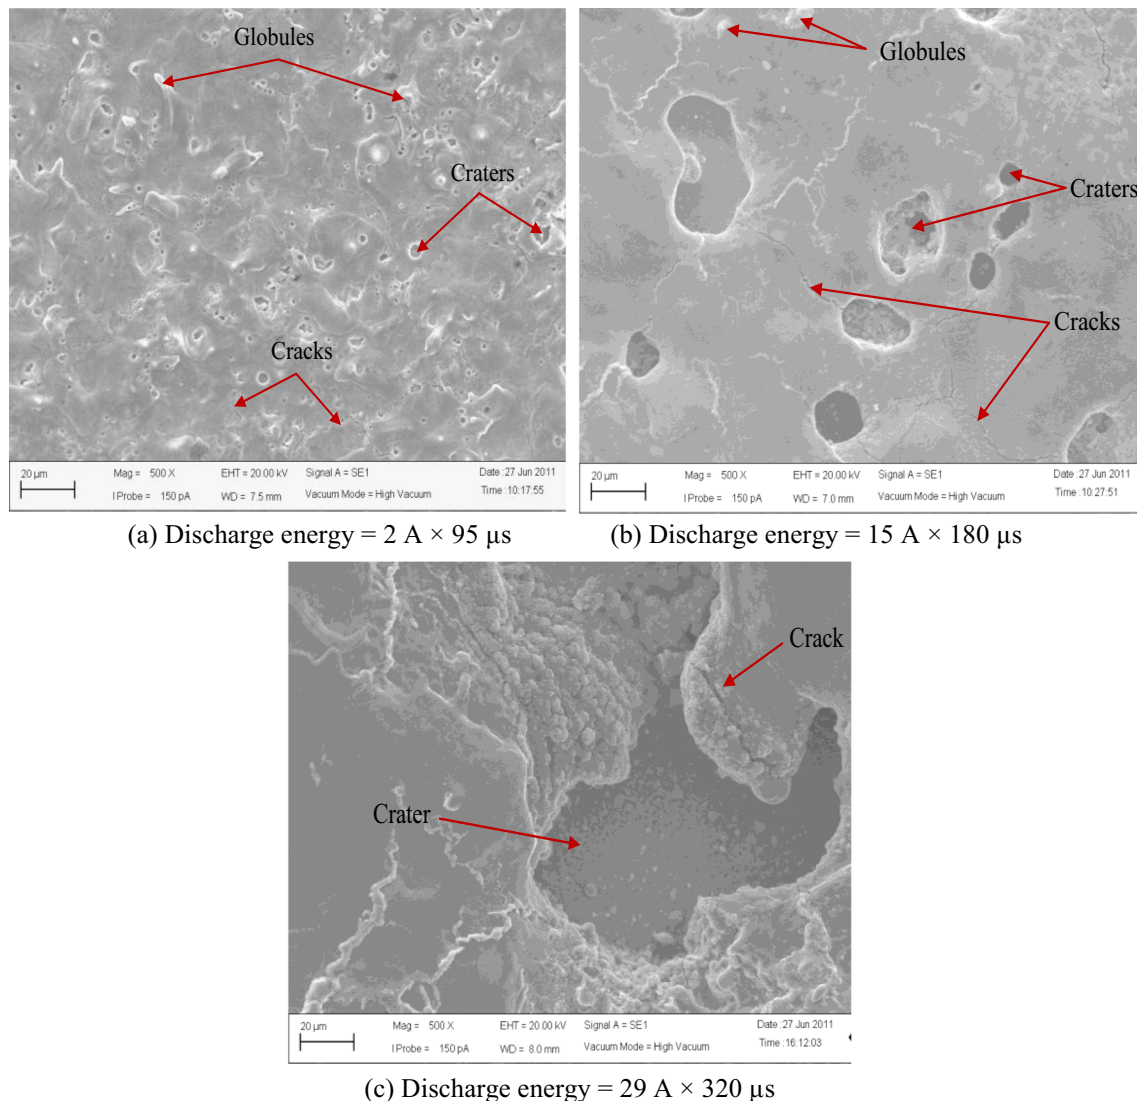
SEM micrographs of the machined surface with Cu electrode
